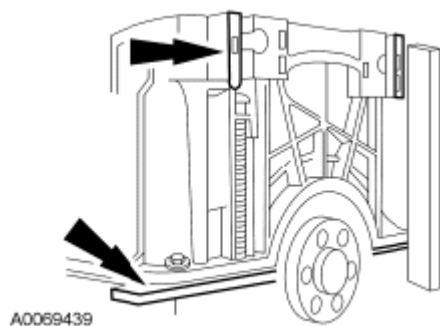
Identifying Transmission Face Of Cylinder Block Cradle With Rear Face Of Cylinder Block
